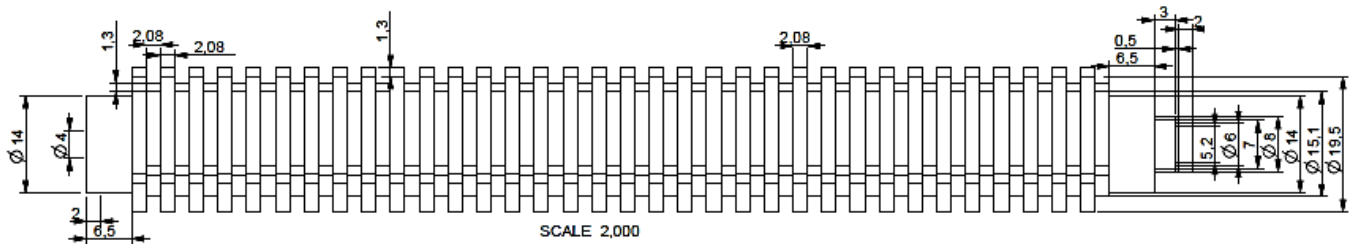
Sectional view of the 20mm chinchin cutting shaft
